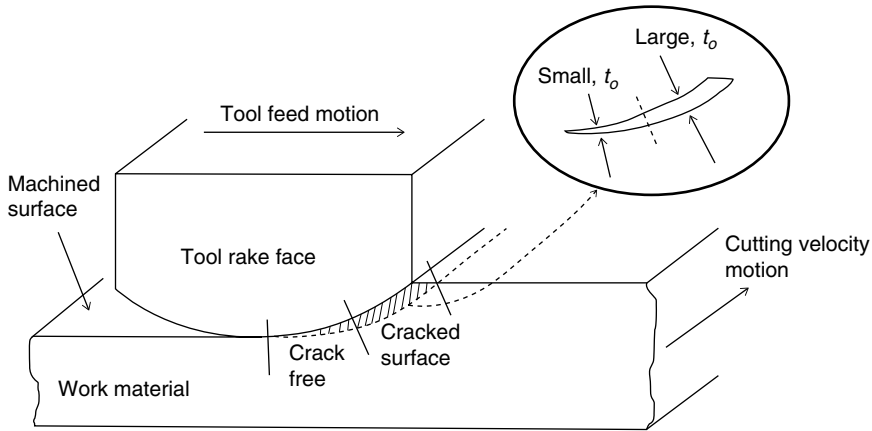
At small t_o crack-free surfaces can be obtained in machining a brittle material
